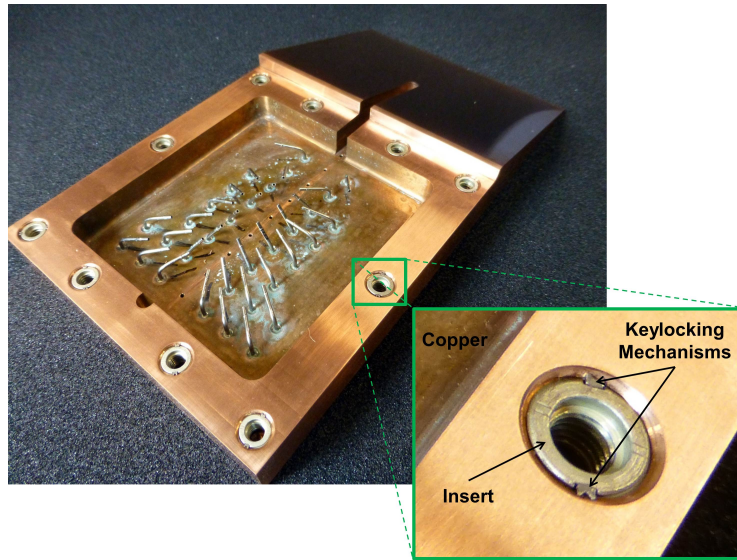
Threaded insert with keylocking mechanisms mounted in the copper component of a sensor.
